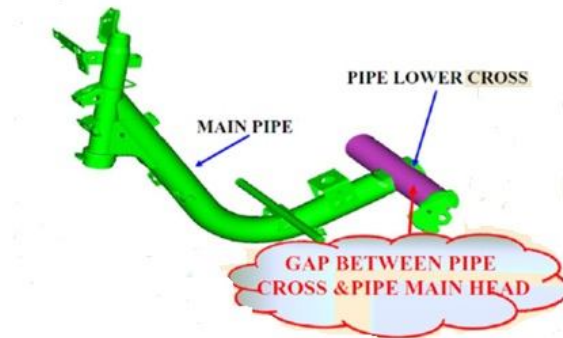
Assembly of Main Pipe with Lower Cross Pipe
